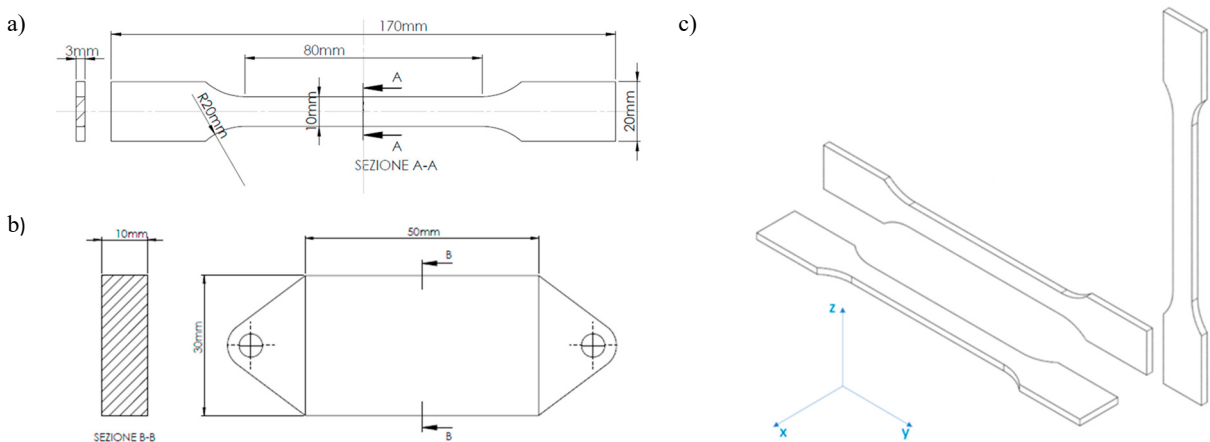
(a) Tensile sample dimensions, (b) machining sample dimensions, and (c) Printing direction for tensile samples. [1]
